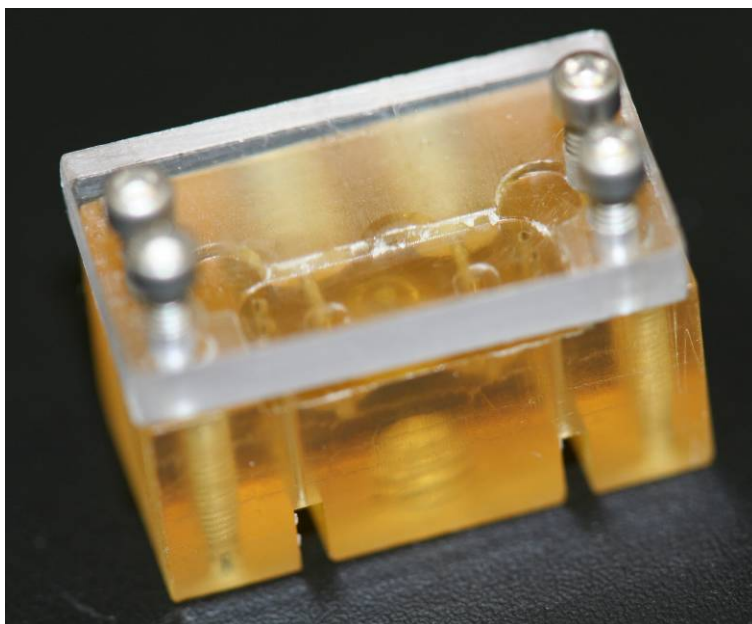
Chip housing assembly. O-rings and pins not shown
